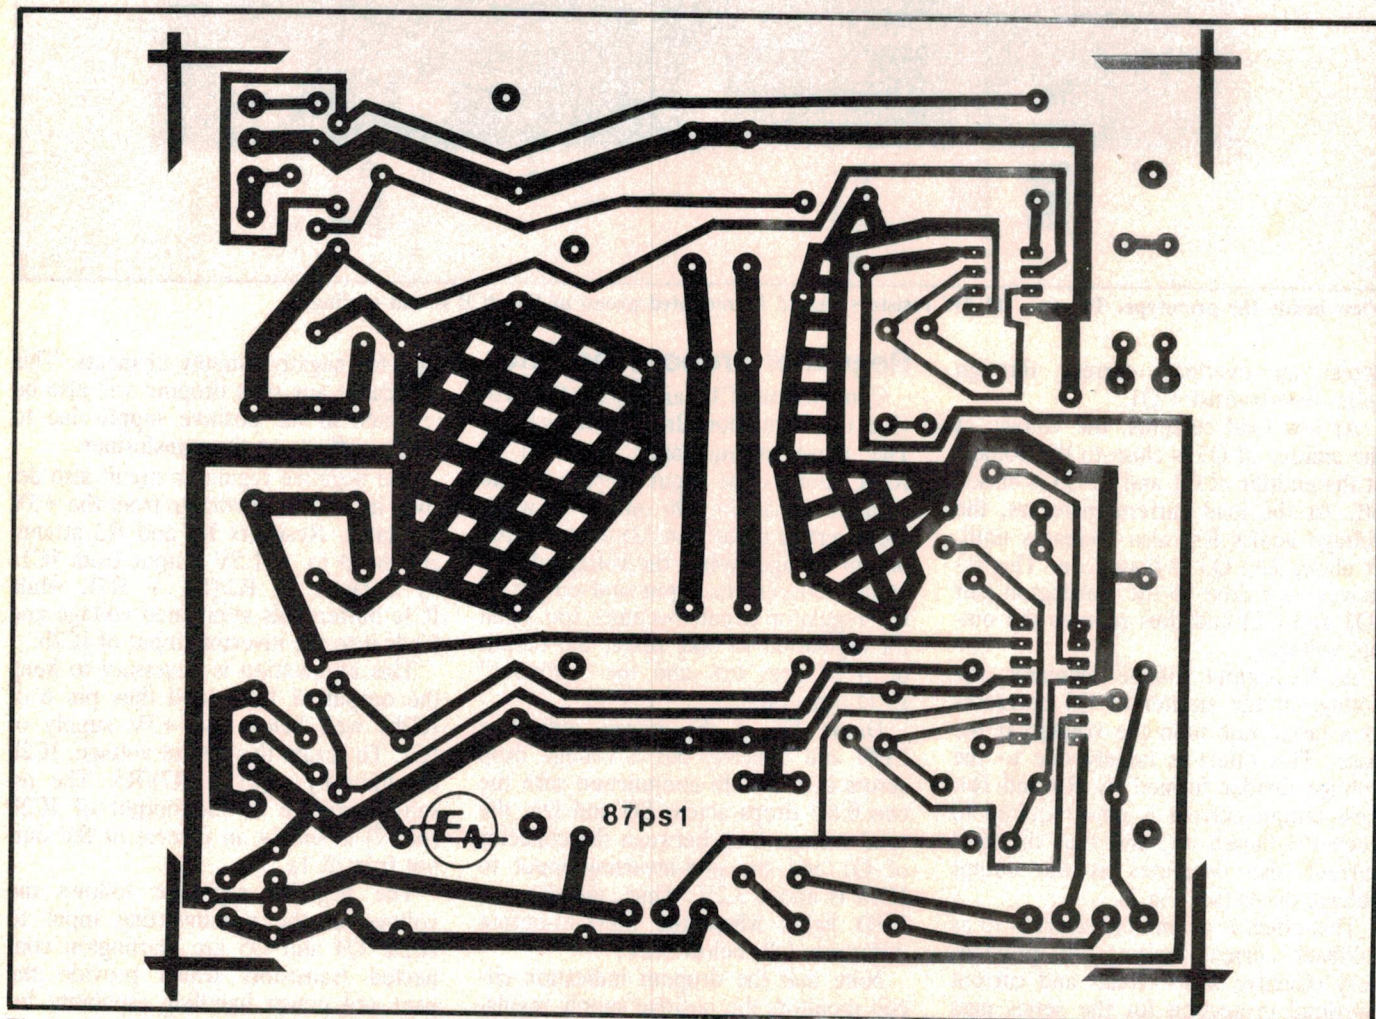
this actual size artwork can be used to make your own PCB. Ready-etched boards are available from retail outlets.
